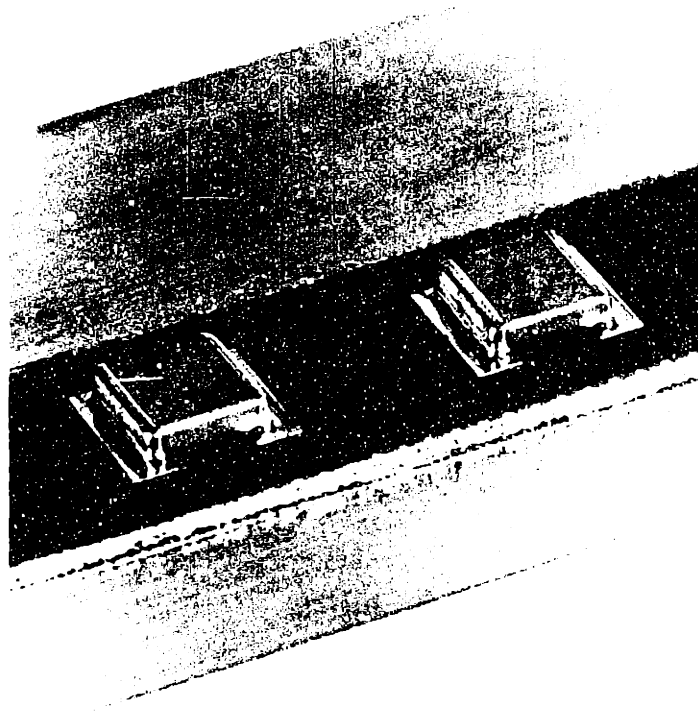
Chip capacitors mounted on a double-sided test board used for thermal cycle testing. These capacitors are .250" by .225" and about .060" thick.
